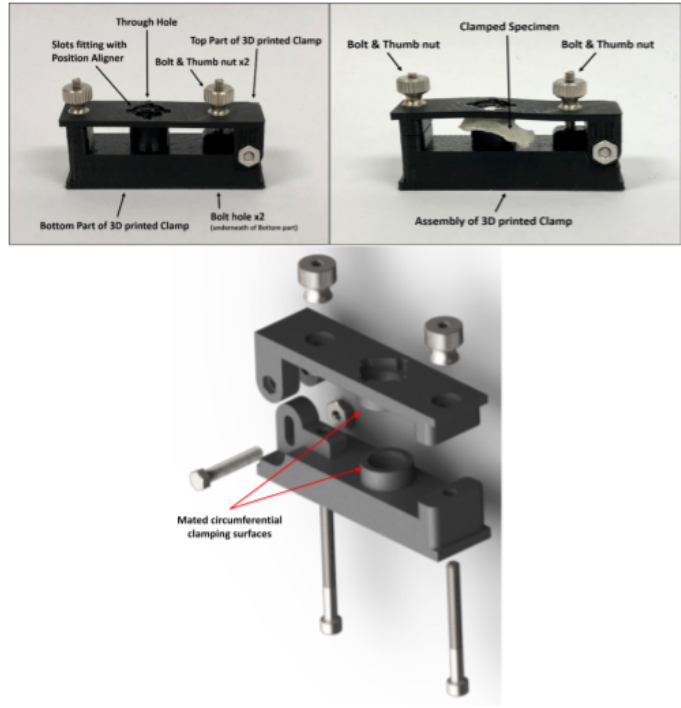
Fully assembled clamp (top left) and with specimen (top right). Exploded view (bottom).
